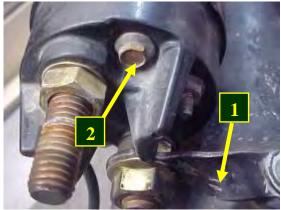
E. The motor strap is painted over (Ref. 1), and there are hex-head screws installed (Ref. 2) where Remy uses TORX screws.
